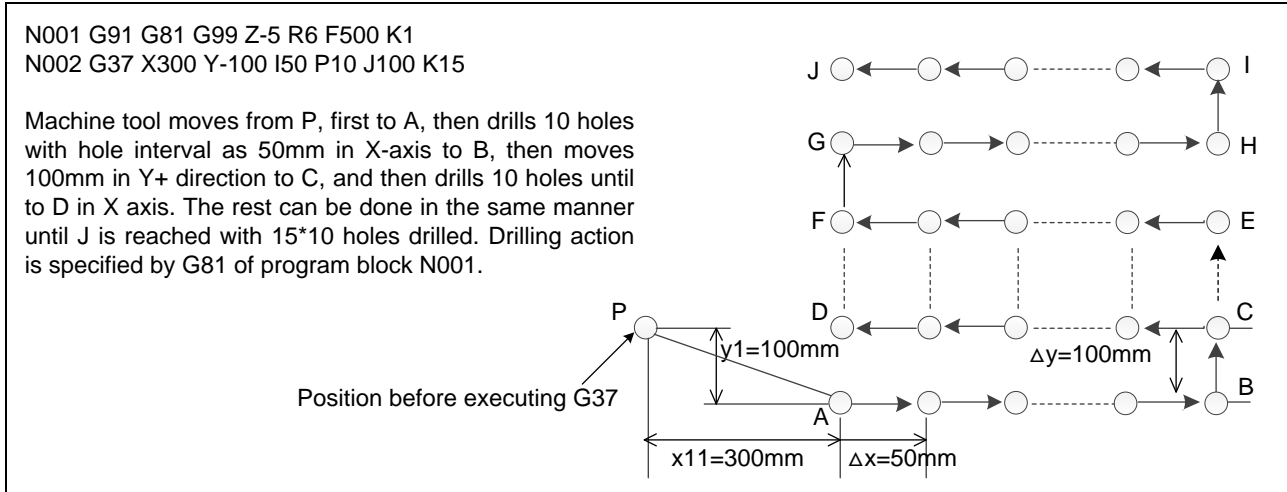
Demonstration for Chess Hole Cycle Drilling
